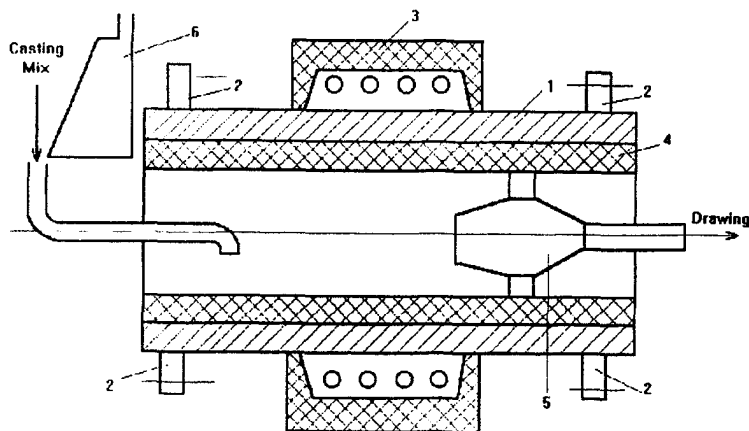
Layout of a unit for centrifugal casting (molding) of tubular blanks: 1 - rotary mold; 2 - mold rotation rollers; 3 - heating chamber; 4 - blank; 5 - rotary gripper of finished pipe extender; 6 - exhaust ventilation.
